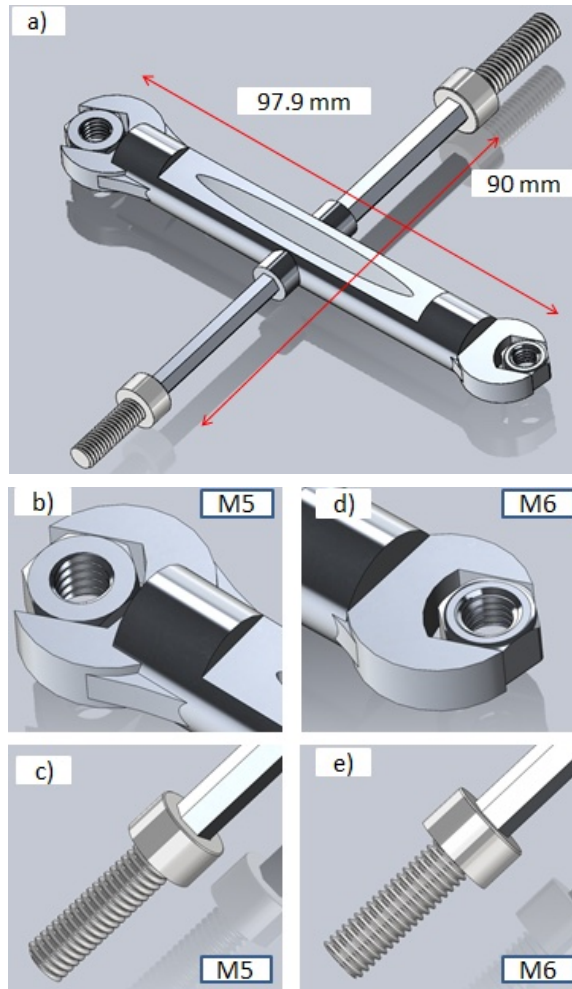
Multi-tool finalised design (a-e) to be casted with recycled aluminium
